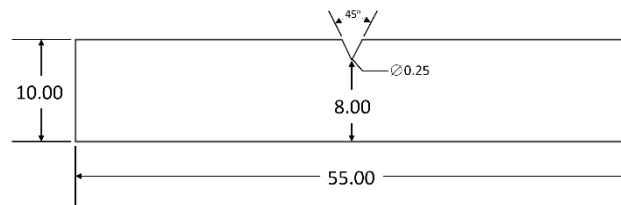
Schematic drawing of the Charpy impact test specimen.
